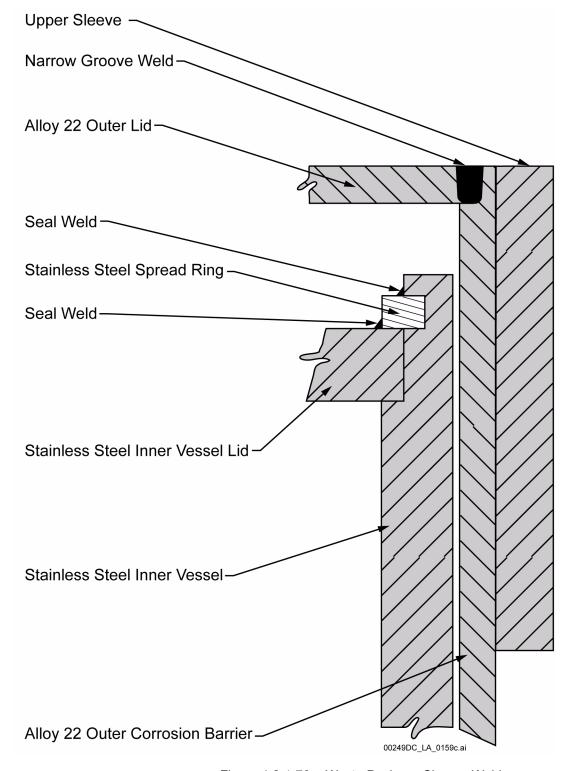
Waste Package Closure Welds (Typical)
